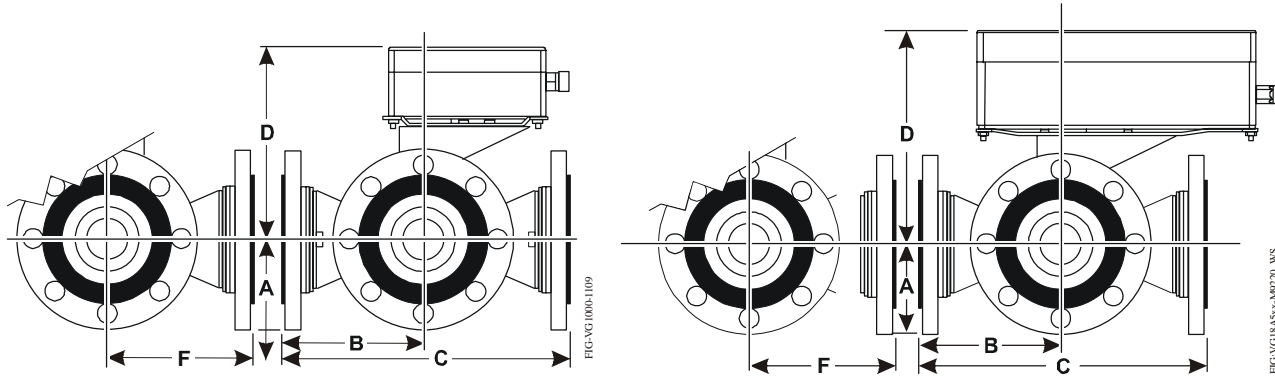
Three-Way Ball Valves with Spring Return Actuators and Weathershields; Dimensions, in. (mm)
